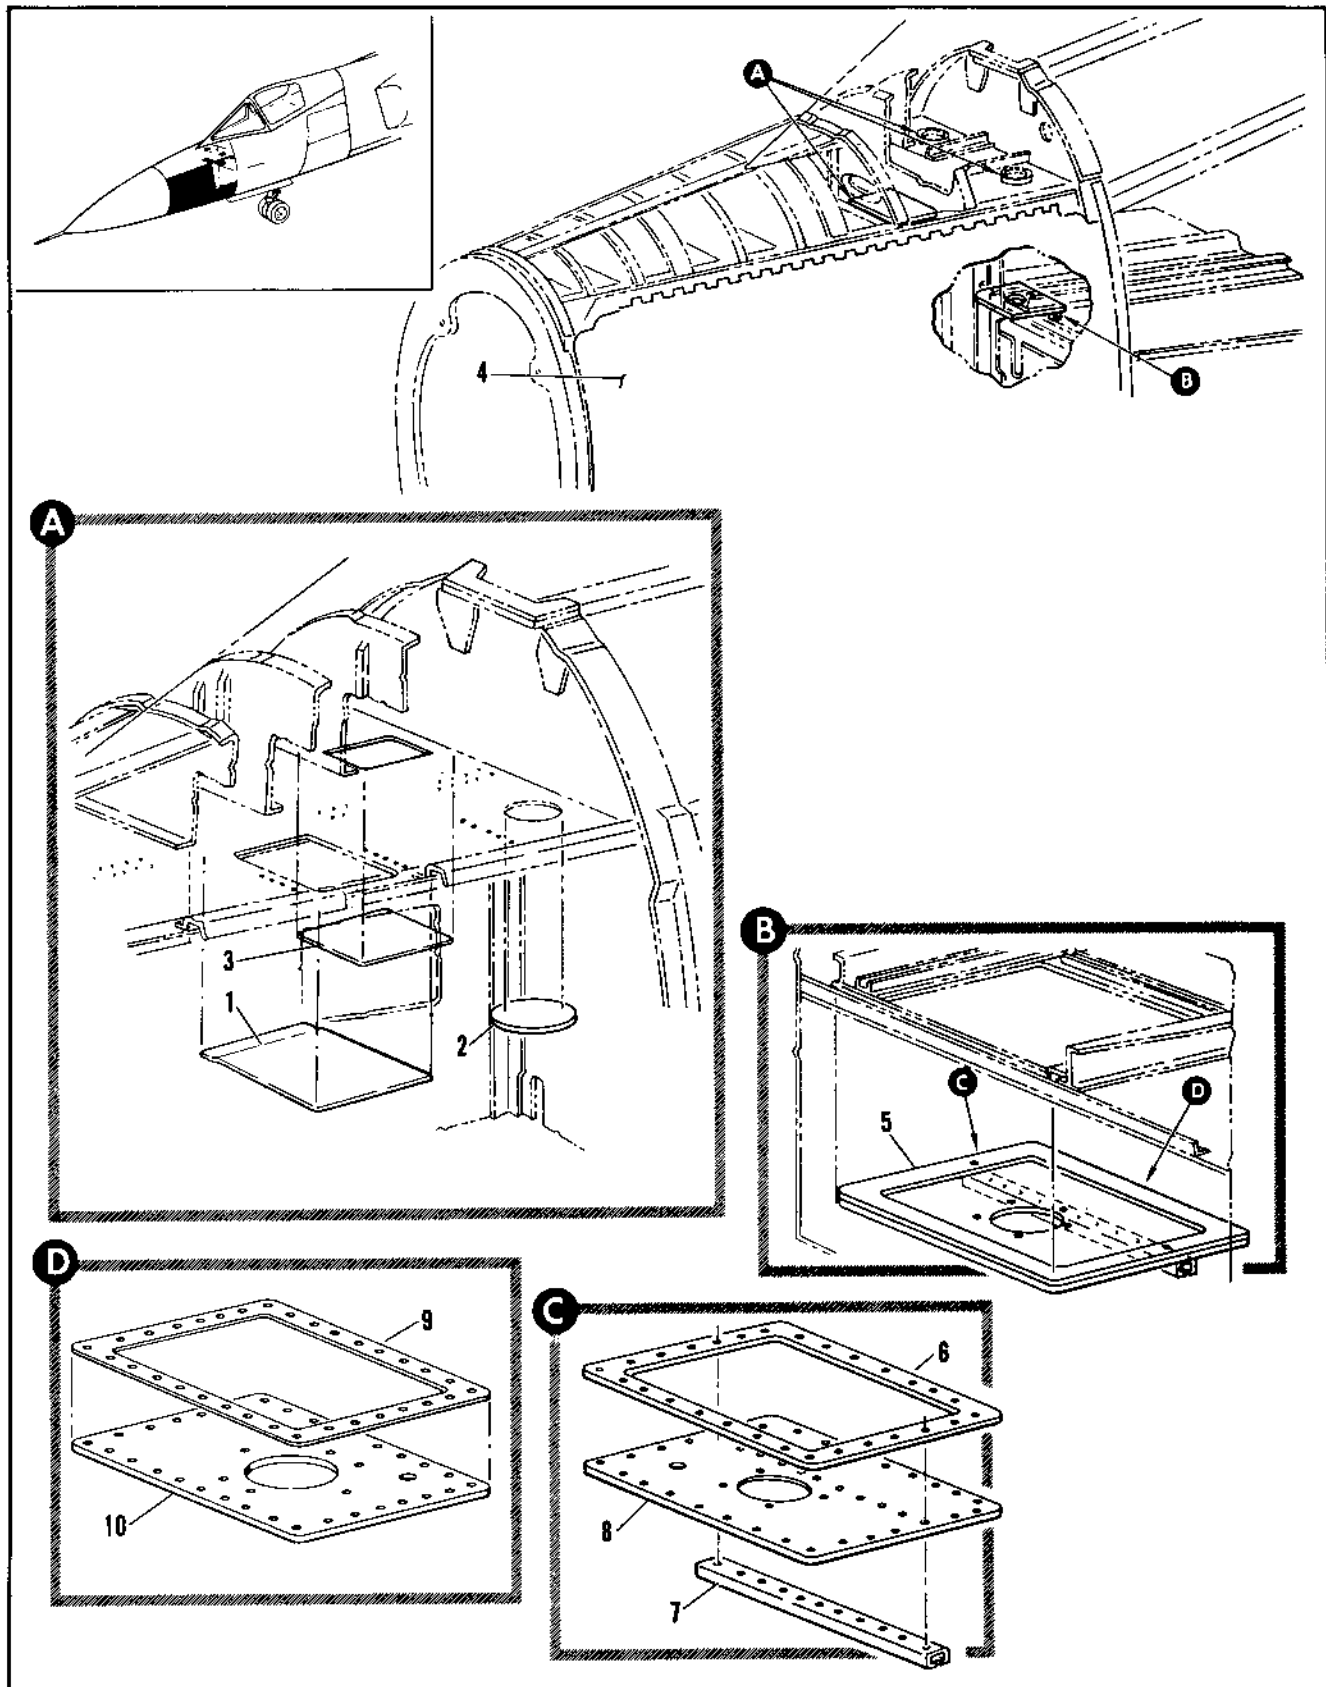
Fuselage Access Doors Sta 41 to 110
